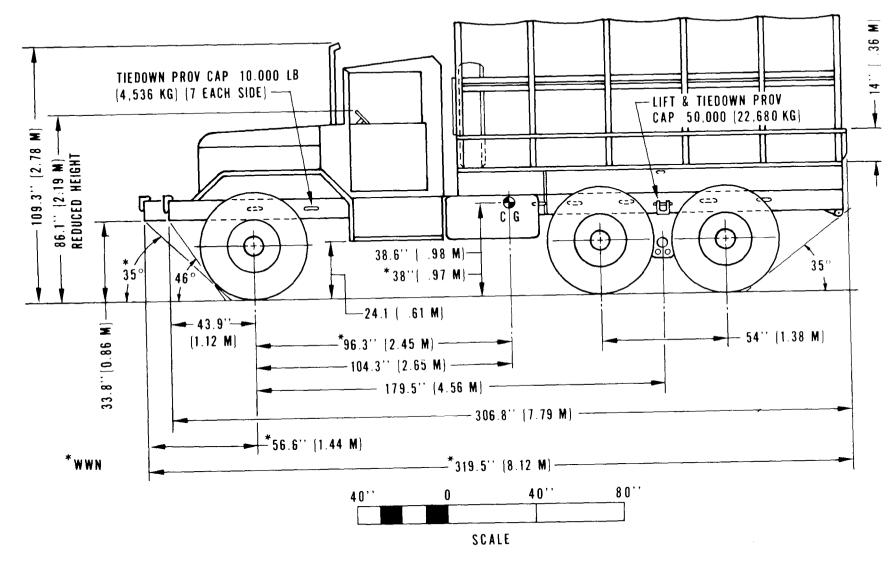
Side elevation of truck, dropside, WWN and WOWN, M813A1.
